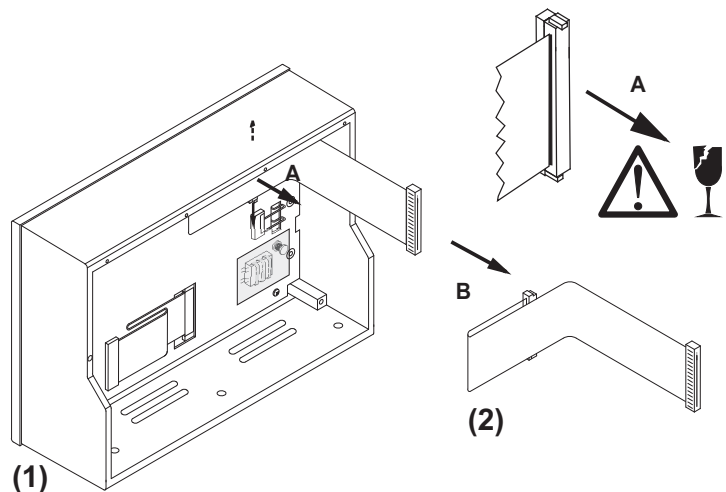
Removal of the connecting flat cable from the display pcb
